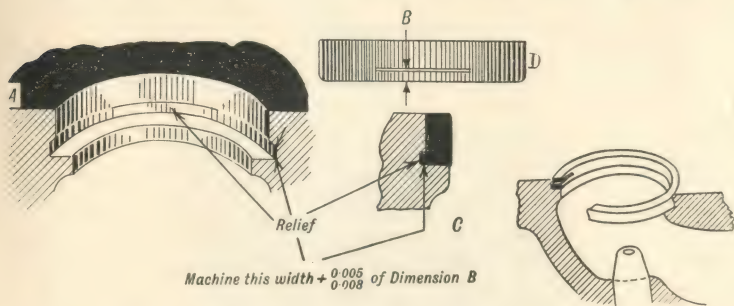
THE WELLWORTHY INSERT VALVE RING
